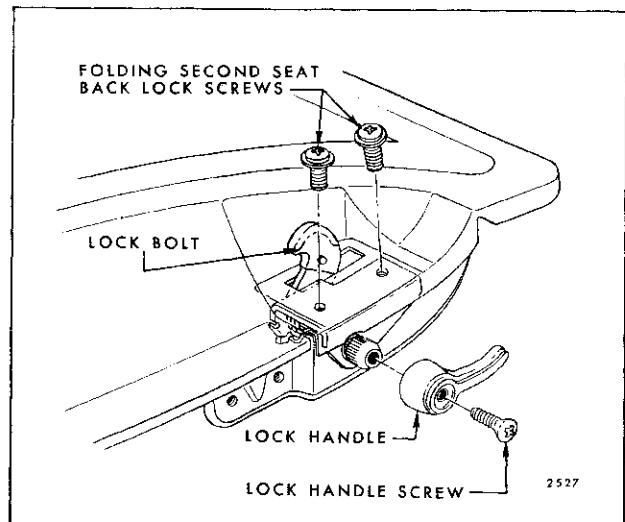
Folding Second Seat Back Lock Installation — All "A & B" Station Wagons (Except "A-65" Styles)
